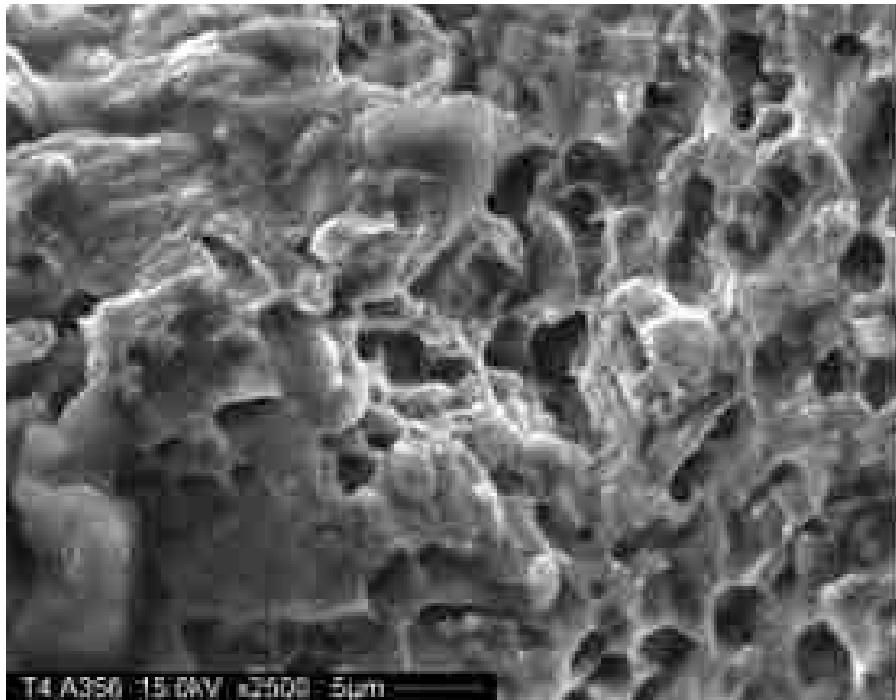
SEM fractograph showing the fracture surface of T4 cast alloy A356
